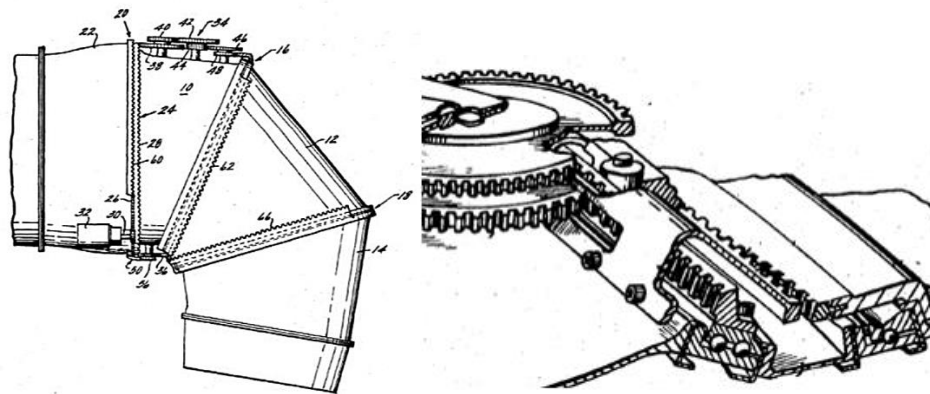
Dudley 3BSD nozzle multi-gear drive system
